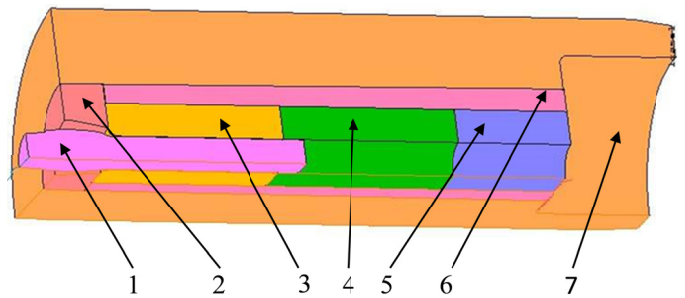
Geometric model of the a tool systems with individual deformable bodies: 1 – screw, 2 – die, 3, 4, 5 – spacer sleeve, 6 – the centering tube blank, 7 – casing
